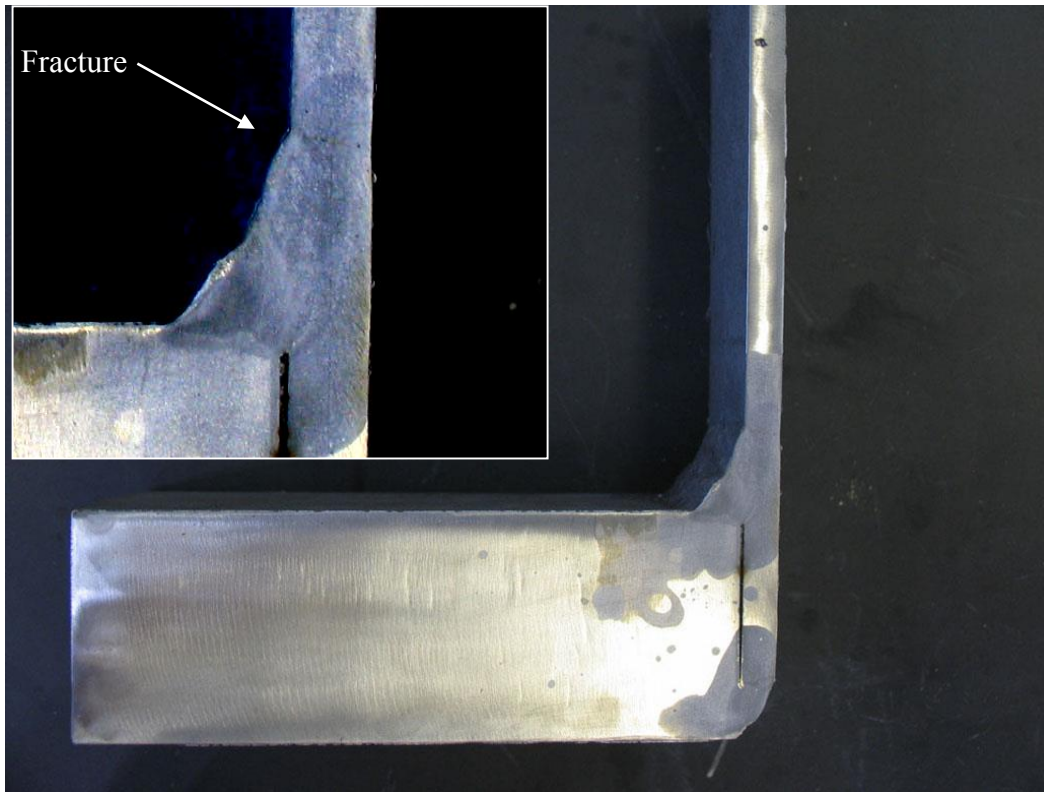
Etched cross section of fillet welded socket connection (Rios 2007)
